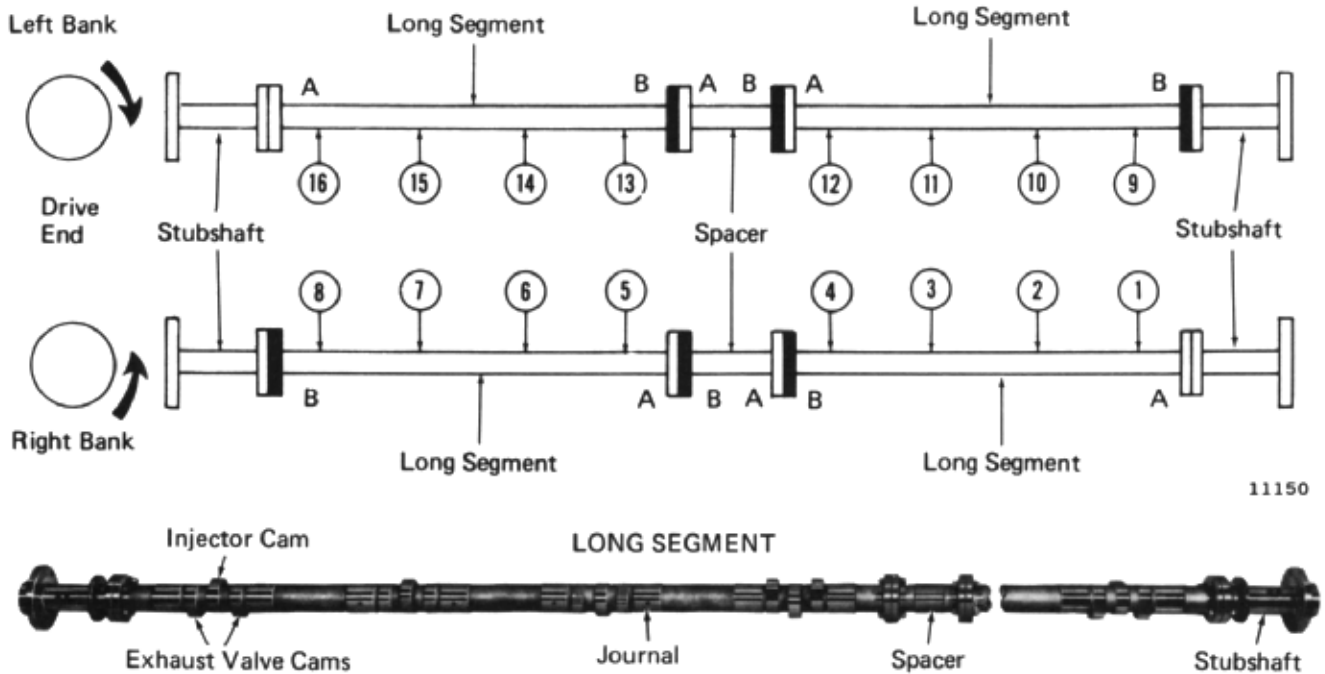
Camshaft Assembly (16-Cyl.)
